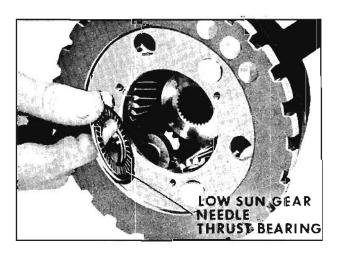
Removing Low Sun Gear Thrust Bearing
